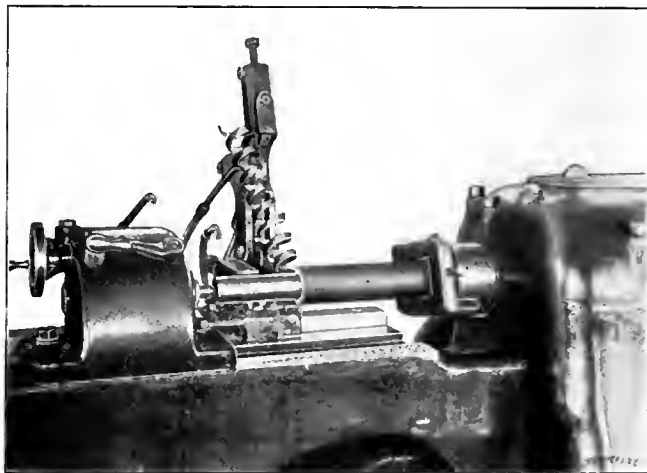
Taking a Stiff Chip on the "Lo-Swing" Lathe with "Blue Chip" Steel.
